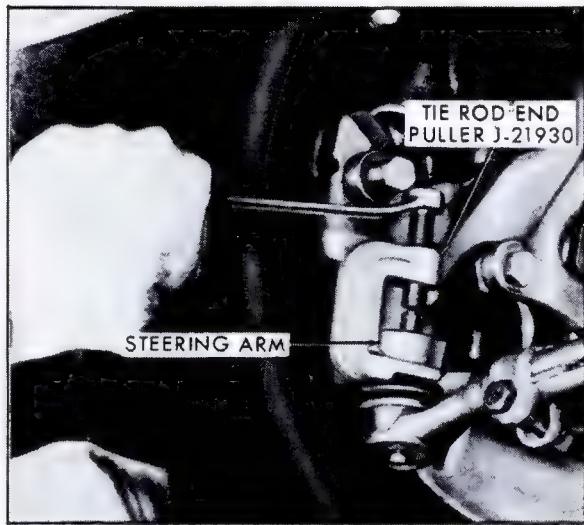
Removing Tie Rod Joint Stud From Steering Arm
